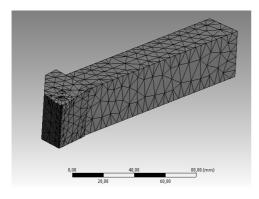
Spreading of FEM mesh over the cutting tool, 5 mm
